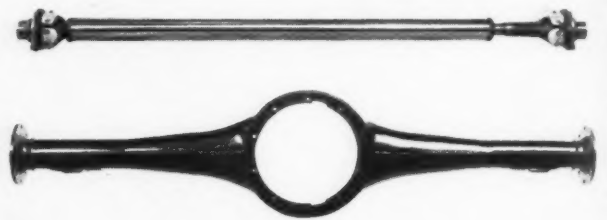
Electrically welded tubing made of strip steel may be used for propellor tubes (top). Pressed steel, welded into an assembly, gives a low-cost rear axle housing
